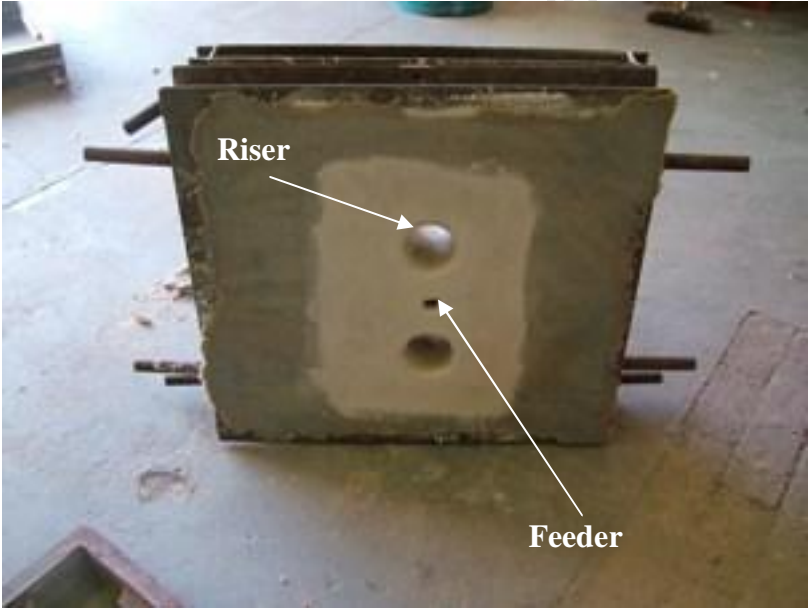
6. Photograph of the top mould (cope) used for sand casting anodes
